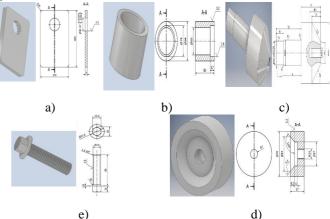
Drawing in 3D format and execution drawing of the stand components (a,b,c,d,e)
